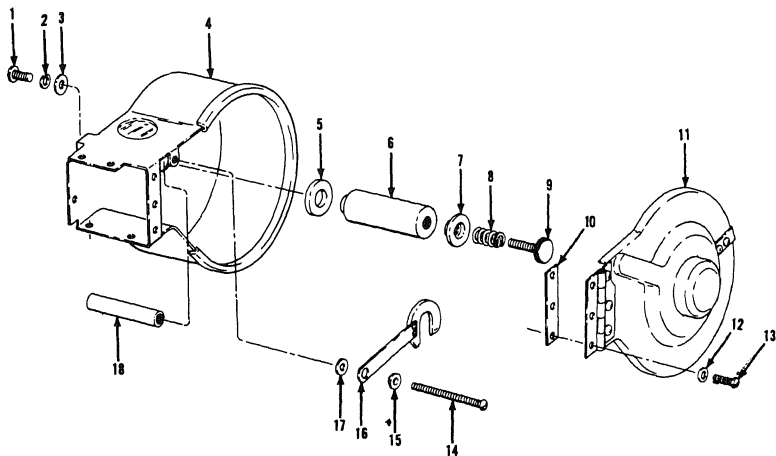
Welding gun wire spool inclosure, removal and installation.
